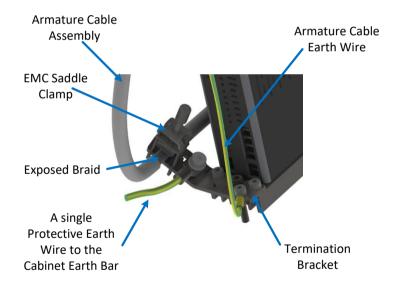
D2103 Armature Cable Shield Connection with One PE Wire
